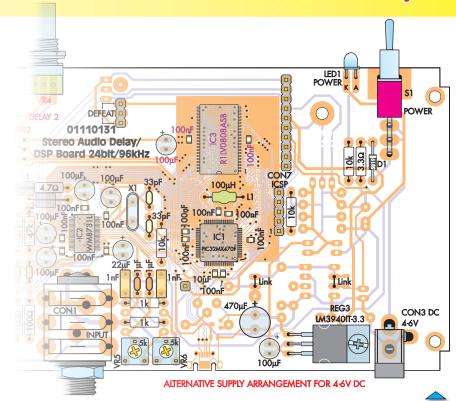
follow this PCB parts layout diagram to install the parts for the 4-6V power supply option. Note that D1 must be changed to a 1N5819 Schottky type.
